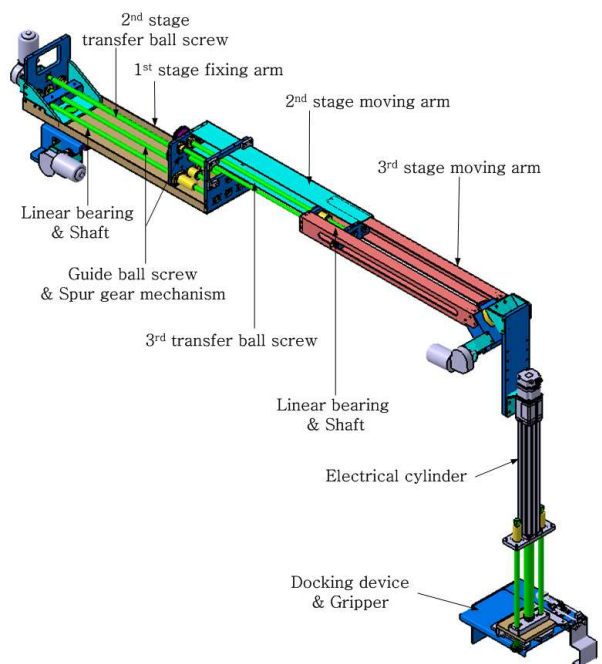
Composition of ball screw-linear bearing guide type for telescopic manipulator
